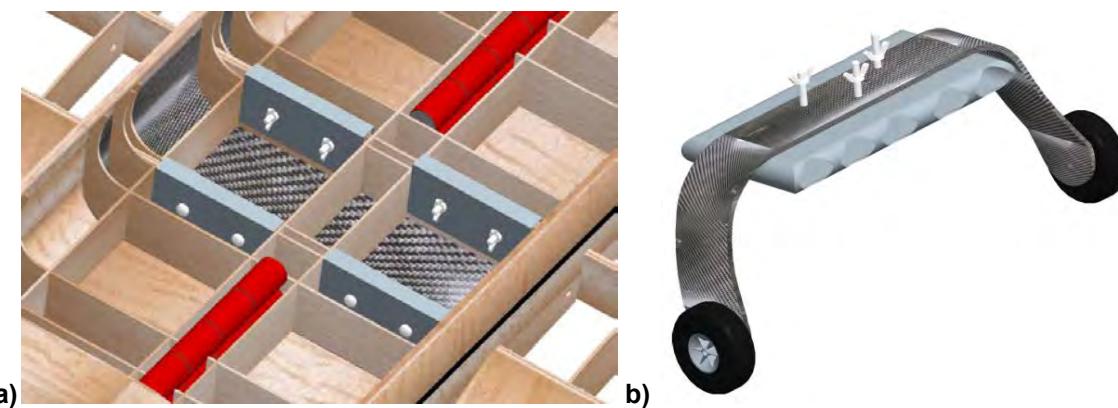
(a) Wing Attachment Mechanism; (b) Main Landing Gear and Bat Mounting Tray
